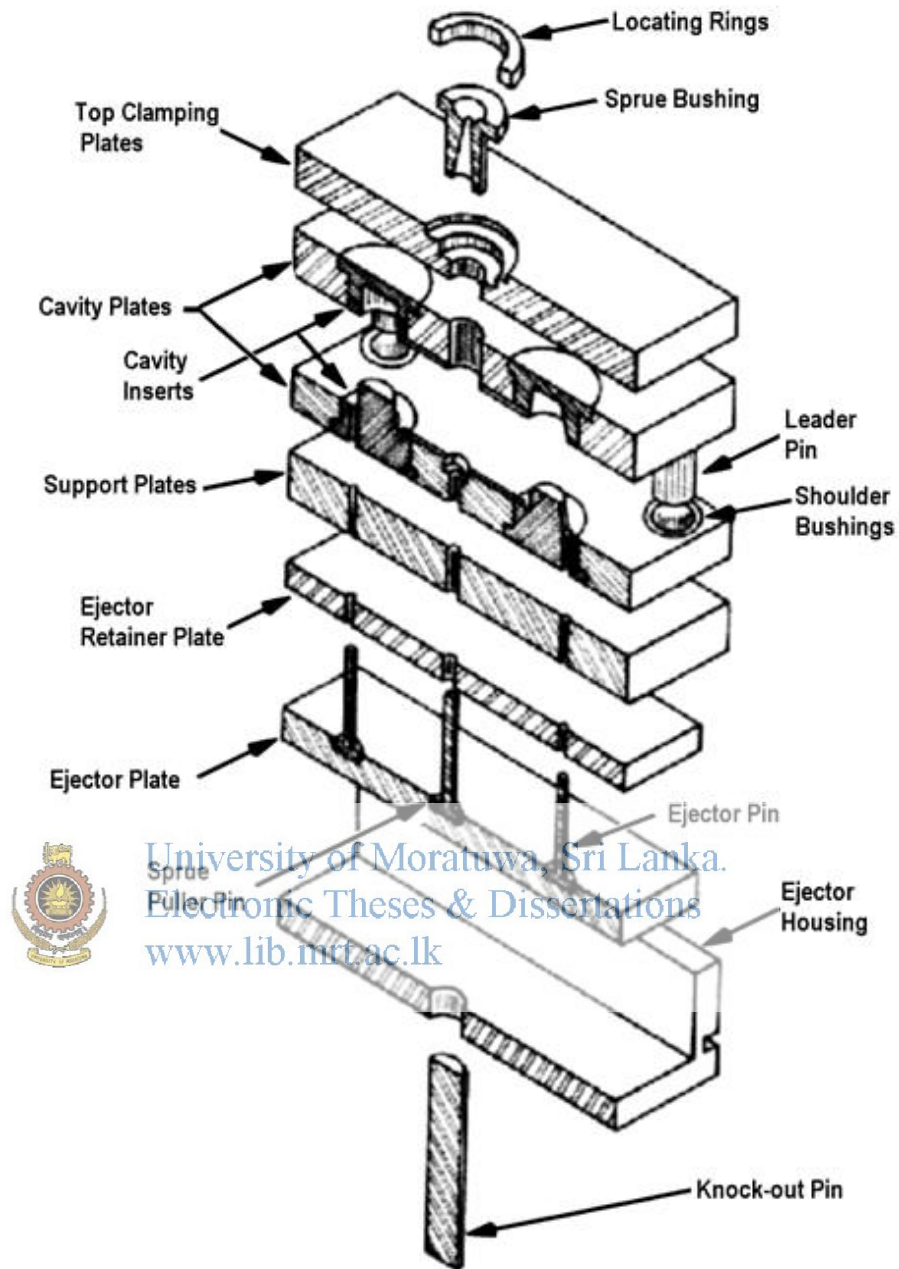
Cross Section of a Typical Two-Plated Injection Mould [4]
